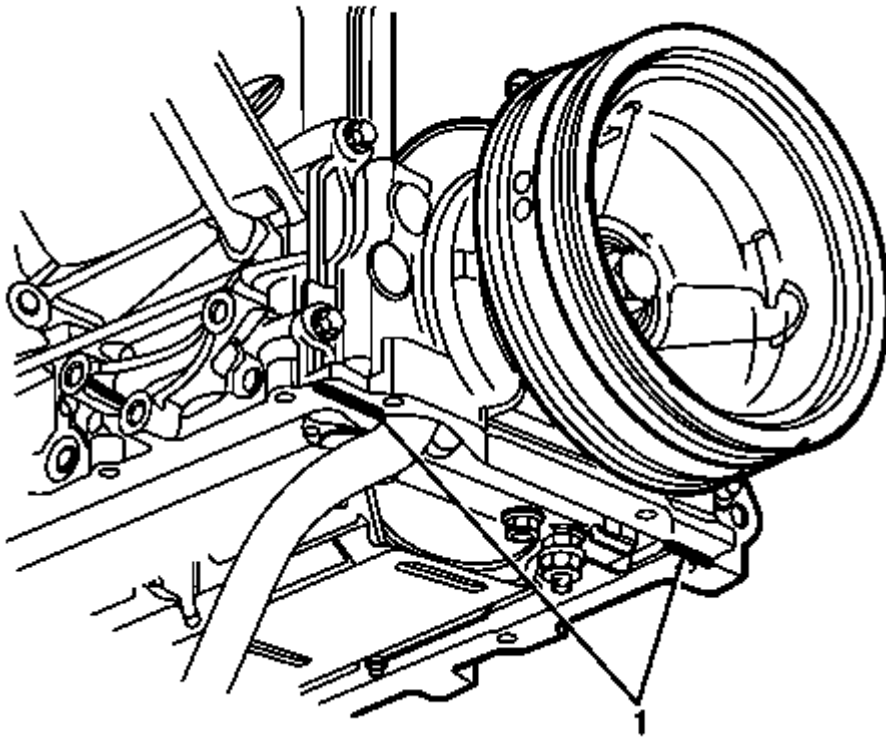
Identifying Engine Block Sealant Application Area (Front Cover Gasket)
